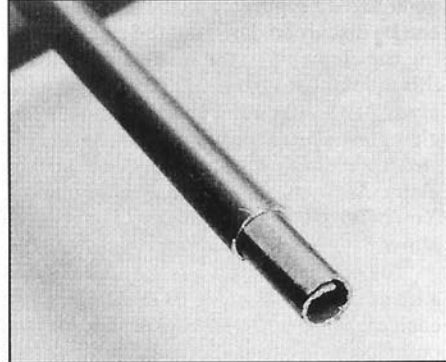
Close-up of a short length of scrap (rolled) TV element folded in on itself and used as an internal butt-joint splice to increase the length of too-short elements. Mounting hardware is placed over the joint, drilled through, and attached to the boom with a self-tapping screw.
